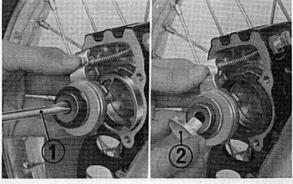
(1) Standard screwdriver (2) Ratchet
